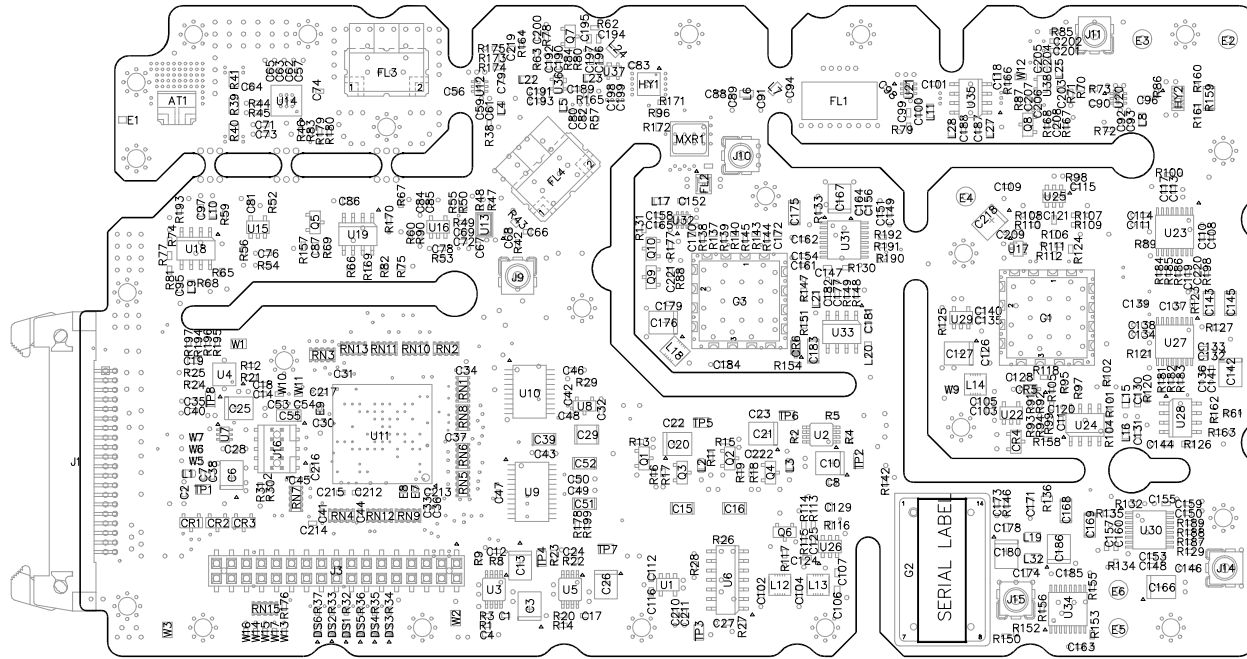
ALT-8000 Digital RAD/A:T PCB Assembly (A1A2A2A3A1)
